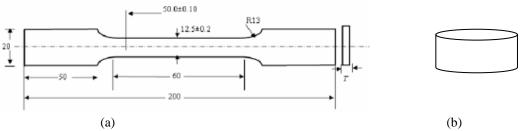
Sample Specification, (a) Tensile test piece, (b) hardness and impact test piece.
